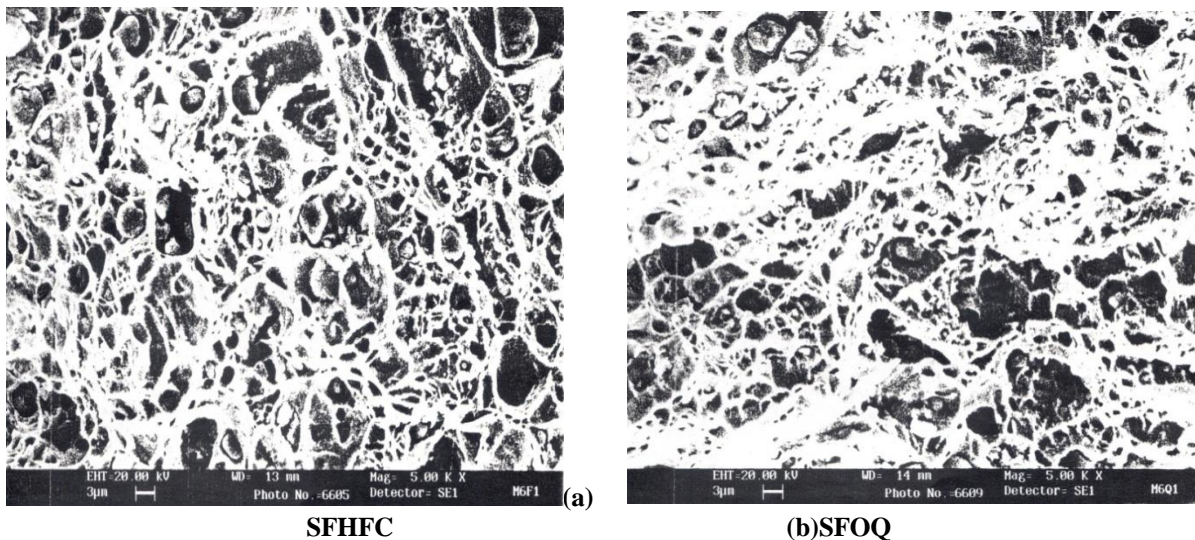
SEM Fractographs of Tensile Tested Specimen fractured Surfaces of Fe-0.16%C-0.7%Mn P/M Steel Under Two conditions of Heat Treatments.
